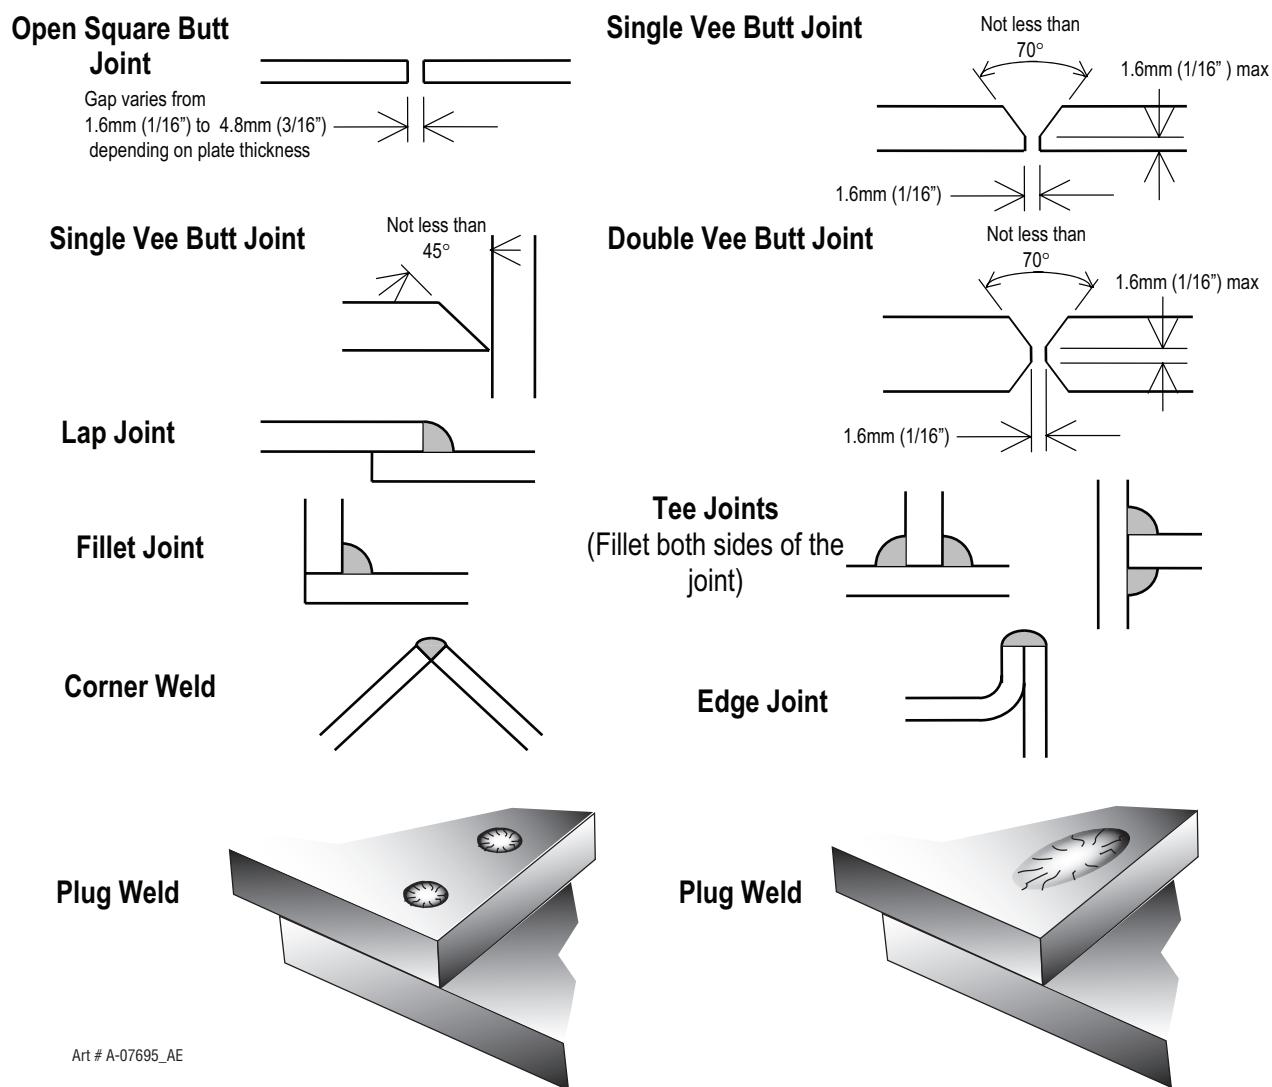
Typical Joint Designs for Arc Welding
